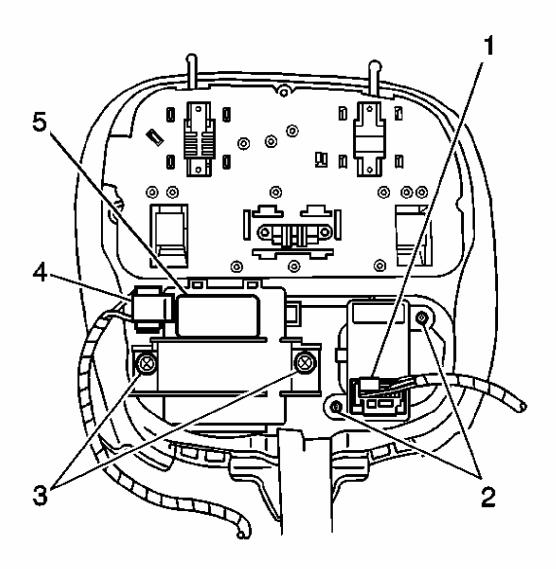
View of Garage Door Opener, GDO Fasteners, Electrical Connector Courtesy of GENERAL MOTORS CORP.
